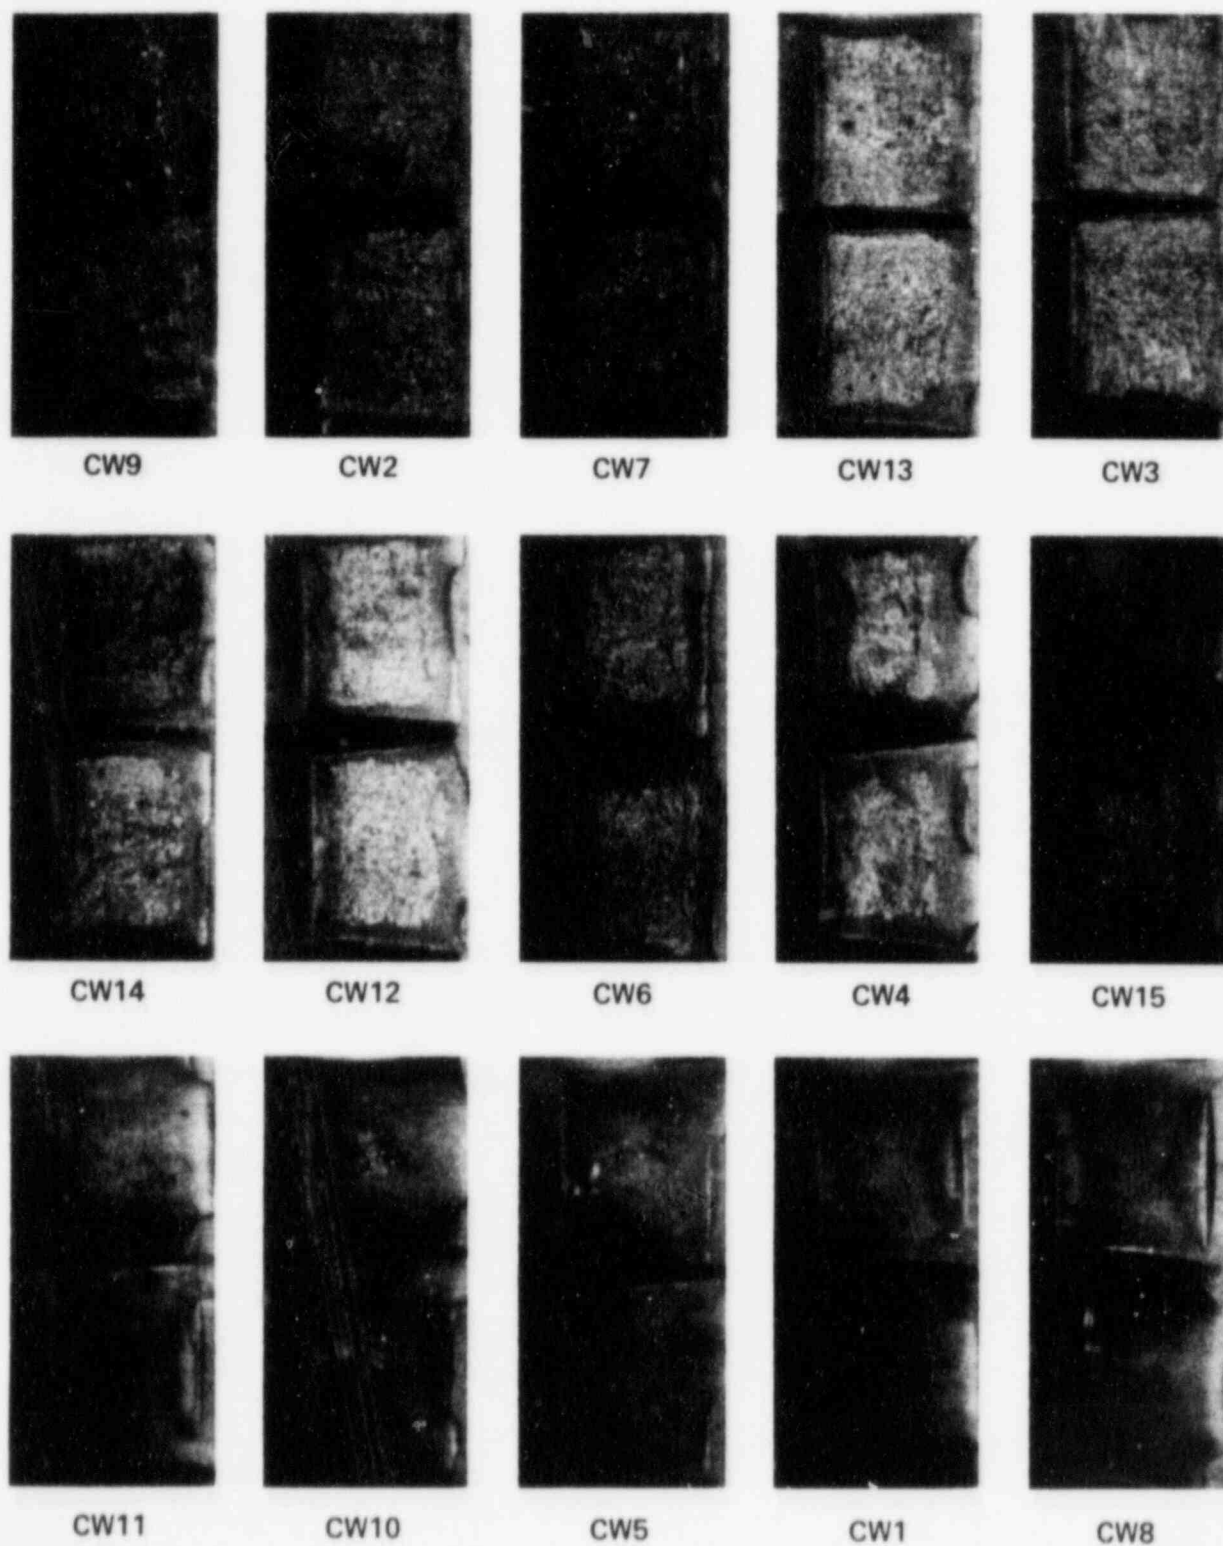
Charpy Impact Specimen Fracture Surfaces for V.C. Summer Unit 1 Weld Metal
